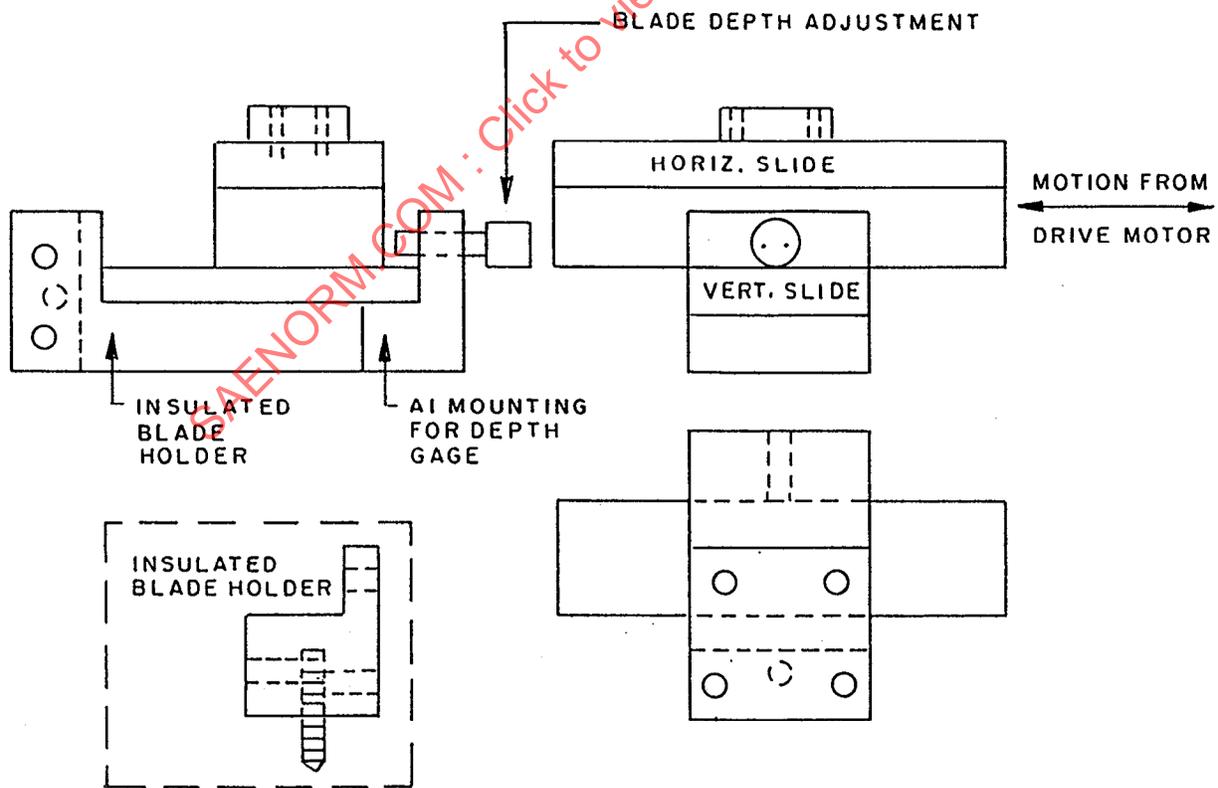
BALL SLIDE BLADE FIXTURE
